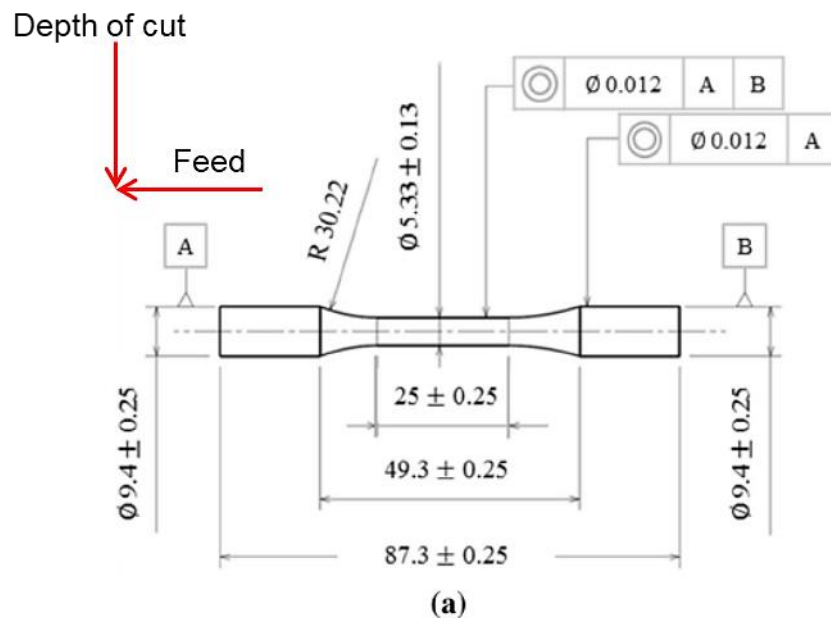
RR Moore rotating bending fatigue test specimens. Dimensions given in millimetres.
